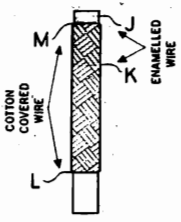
SLUG TUNER ASSEMBLY (Rear View)
